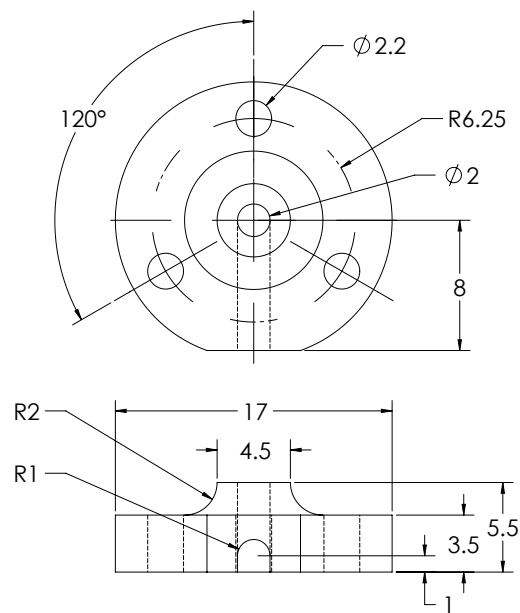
Implant holder used to mount the CI prototype to the Nano17 sensor.
